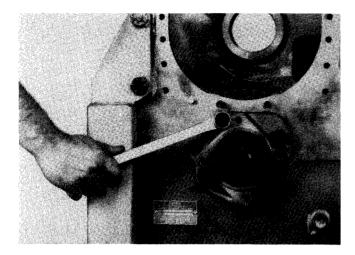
Remove output shaft rear bearing cap bolts and washers.
